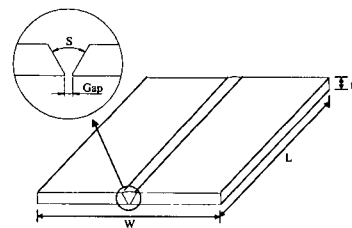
Schematic diagram of butt weldment for experiment
